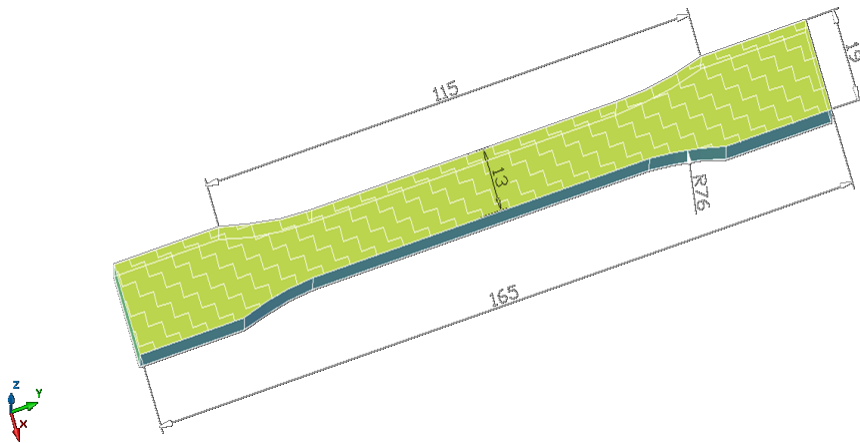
Dimensions of the tensile specimens according to ASTM 638-10
